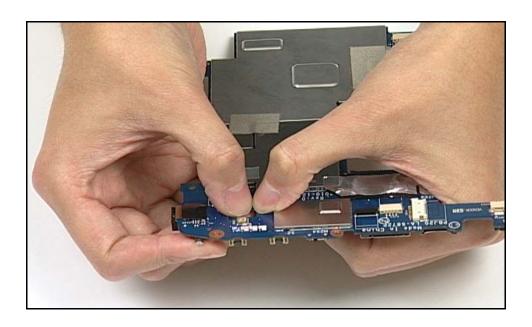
Removing Rear CCD Holder (2 of 3)
